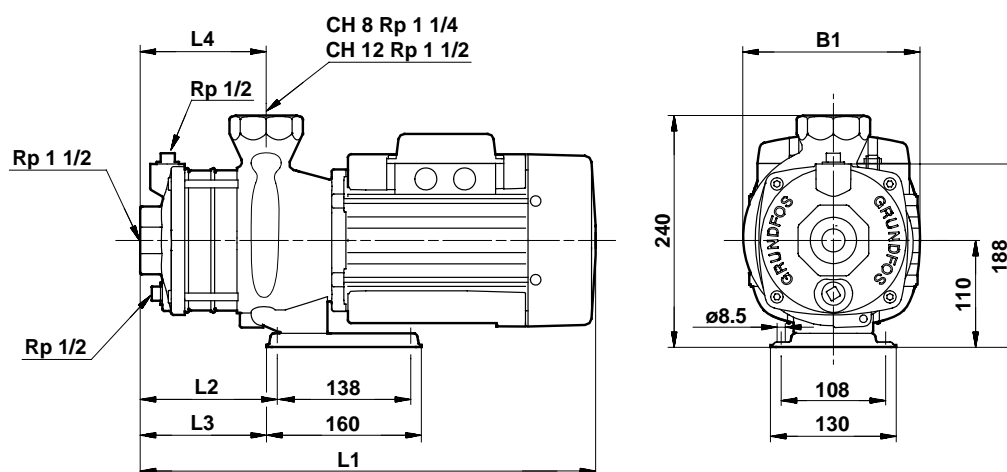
Dimensional sketches CH, CHN 8 and 12 with MG 90 motor
